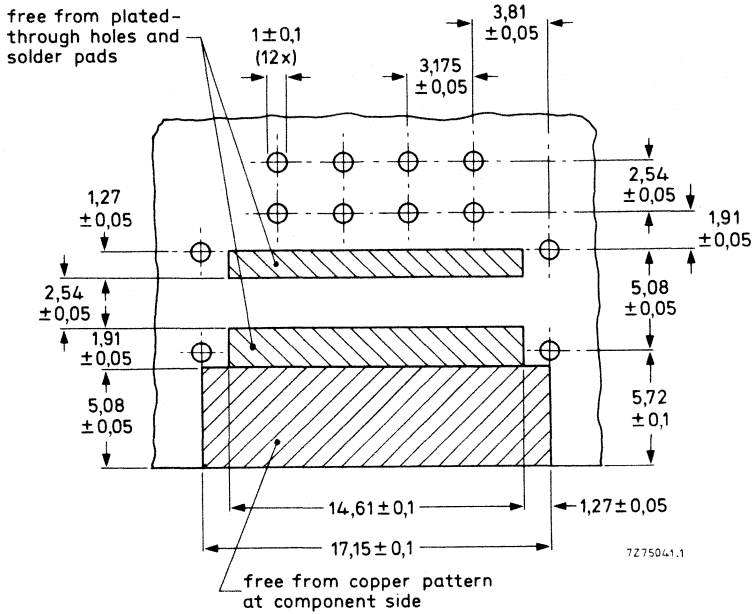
Hole pattern for the spring contact box with 8 pins.
